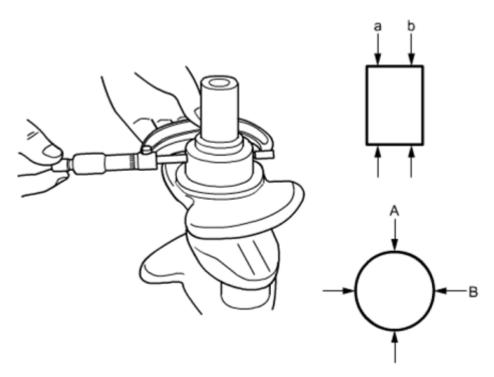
Checking Crankshaft Journal Outside Diameter Courtesy of SUZUKI OF AMERICA CORP.
